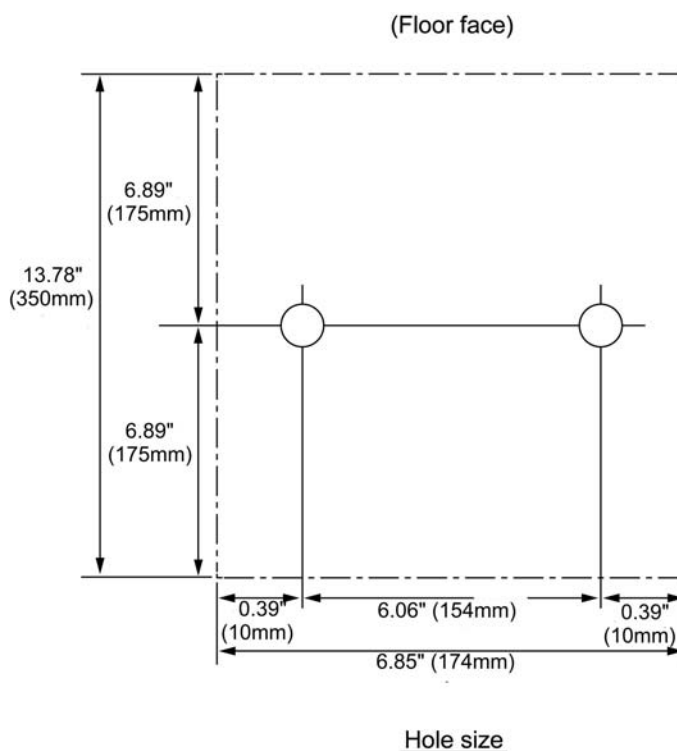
Stand Mount Spacing Guide (CHS1U-AU+CHS2U-AUx1 Chassis Installation)
